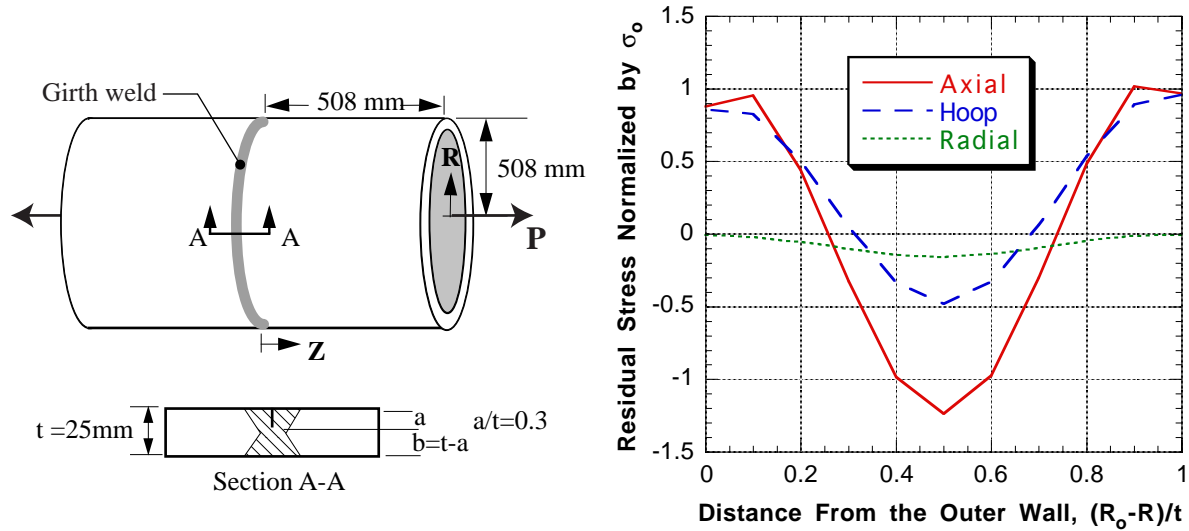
(a) Girth-welded pressure shell, (b) RS in the unflawed condition
